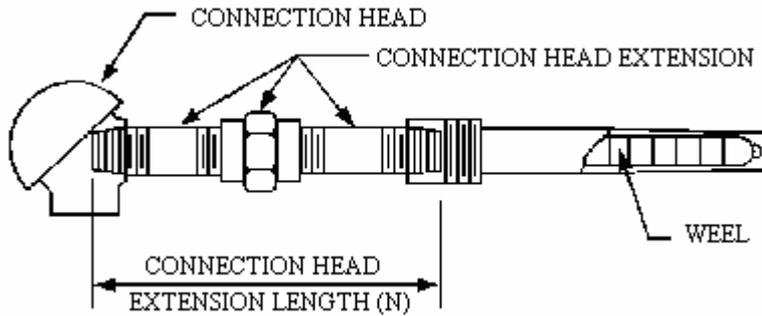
THERMOCOUPLE ASSEMBLY WITH THERMOWELL
